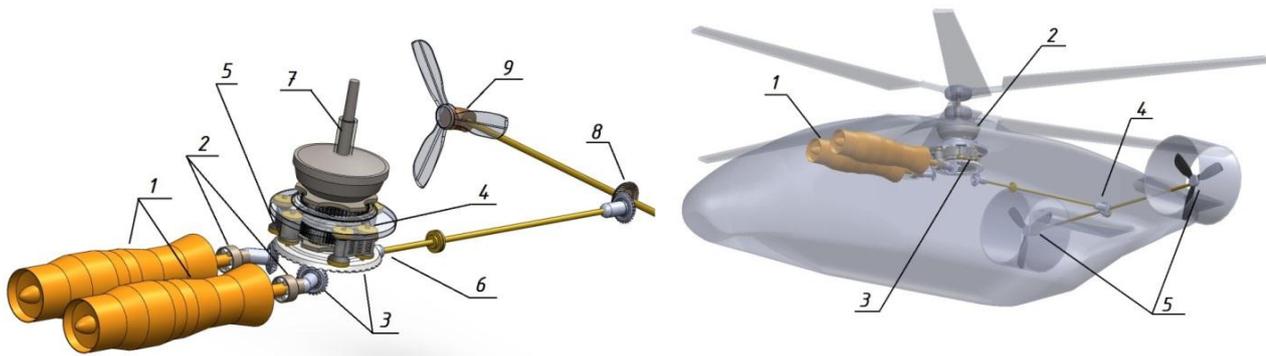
Model of continuously variable mechanical transmission packaging in the high-speed helicopter with 2 pushing blades: 1-engines (GTE); 2 - freewheel; 3 - bevel gear of first reduction level; 4 - planetary mechanism with two power threaded and CVT; 5 – mechanical CVT variators; 6 - drive of pushing blades (bevel gearbox); 7 - planetary part of the main gearbox with shaft rotor blades; 8 - angled drive (bevel gearbox); 9 - angular gear drive of pushing blades.
